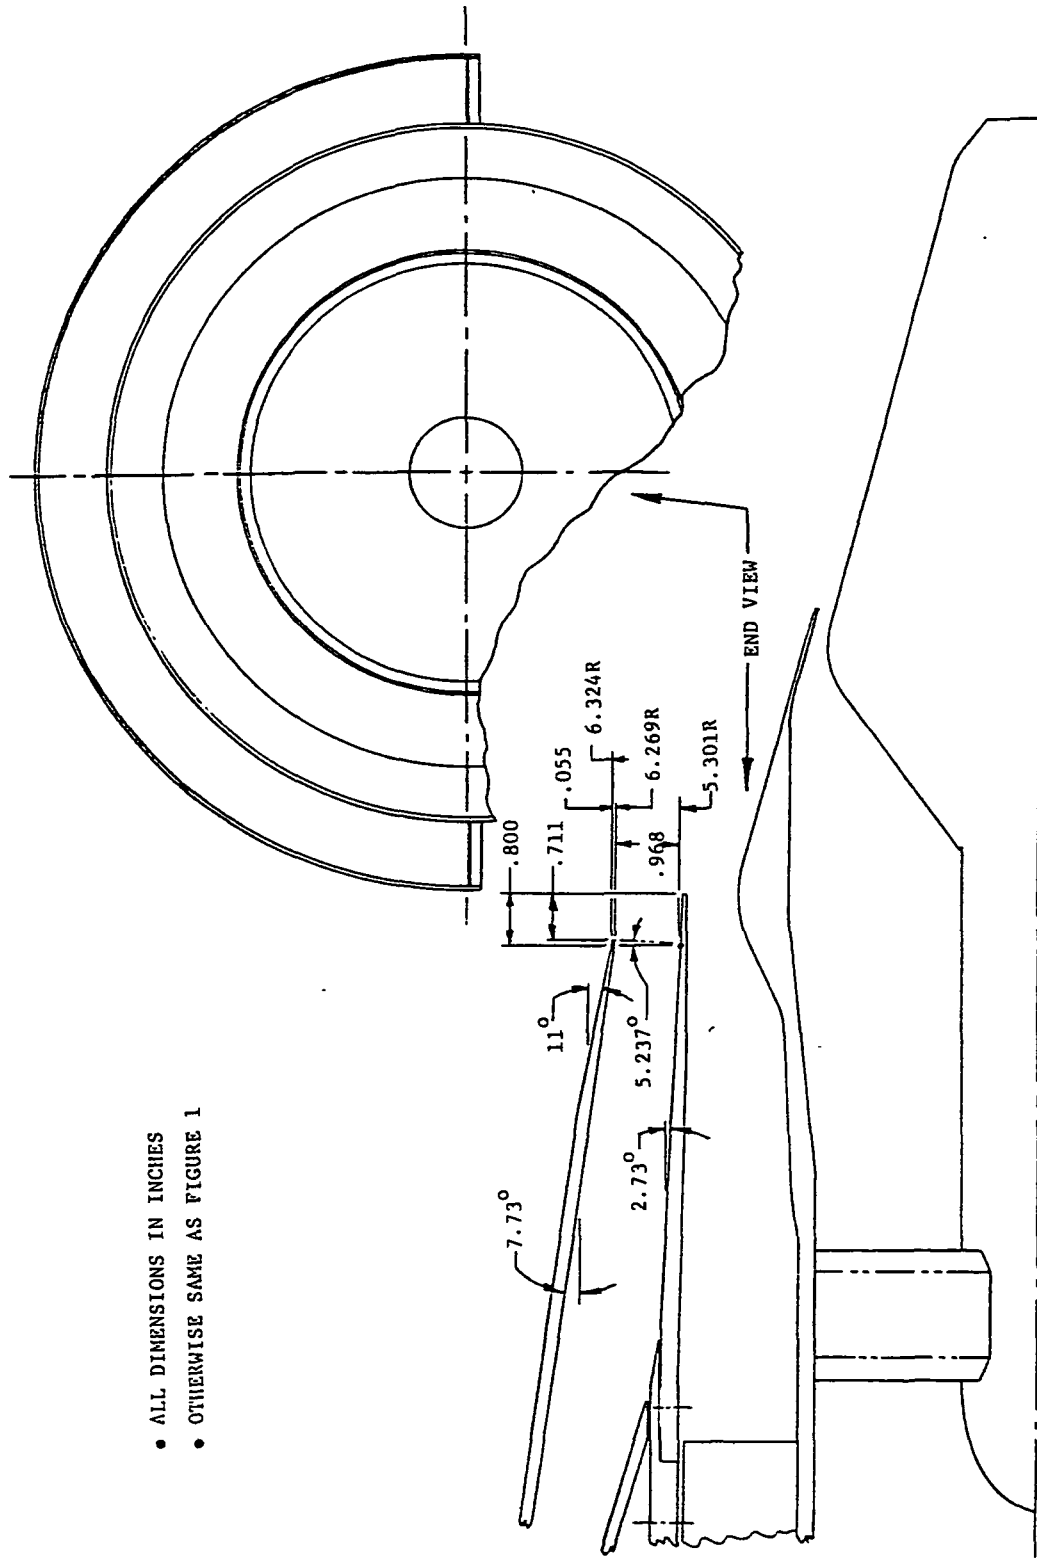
SCHEMATIC OF UNSUPPRESSED COANNULAR PLUG NOZZLE WITH 360° SHIELD, CONFIGURATION TAS-14.
